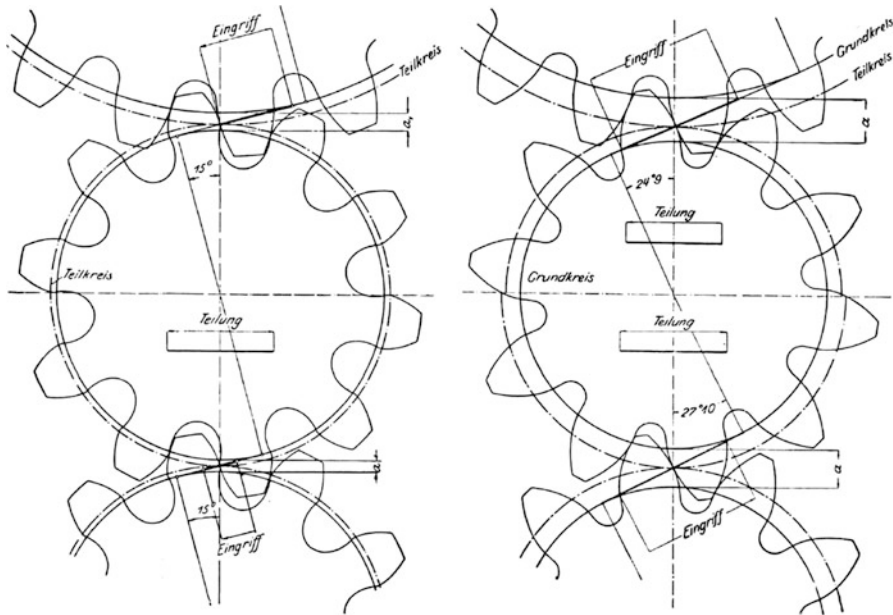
Threesome gear train (left) after Willis; (right) after Hoppe (in [2])
